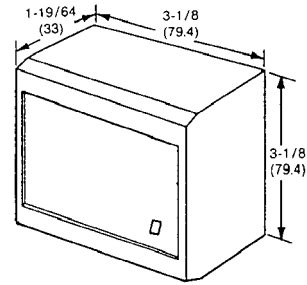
Overall Dimensions European 1/4 DIN Standard Mounting.
